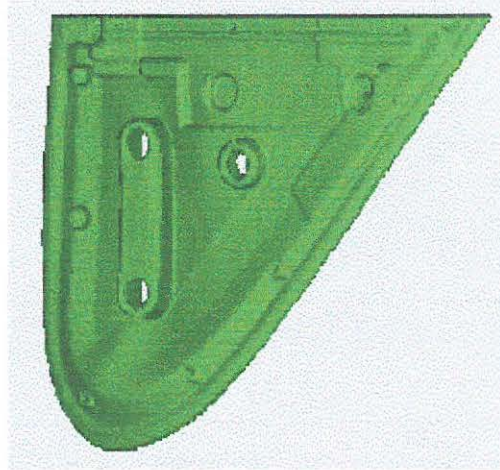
Motorcar door window rubber seal, frontal-right-hand view.
